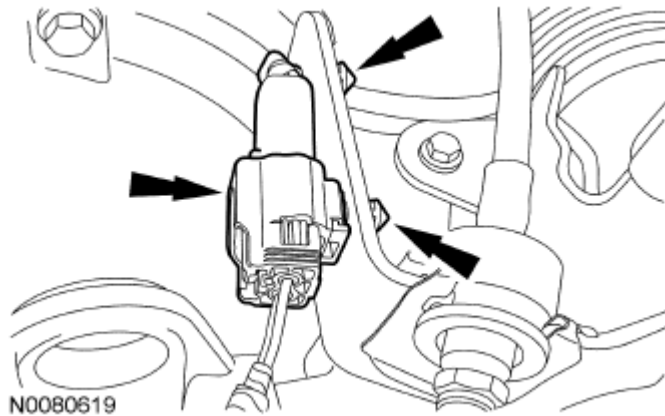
Locating Vehicle Speed Sensor Electrical Connector And Pin-Type Retainers
